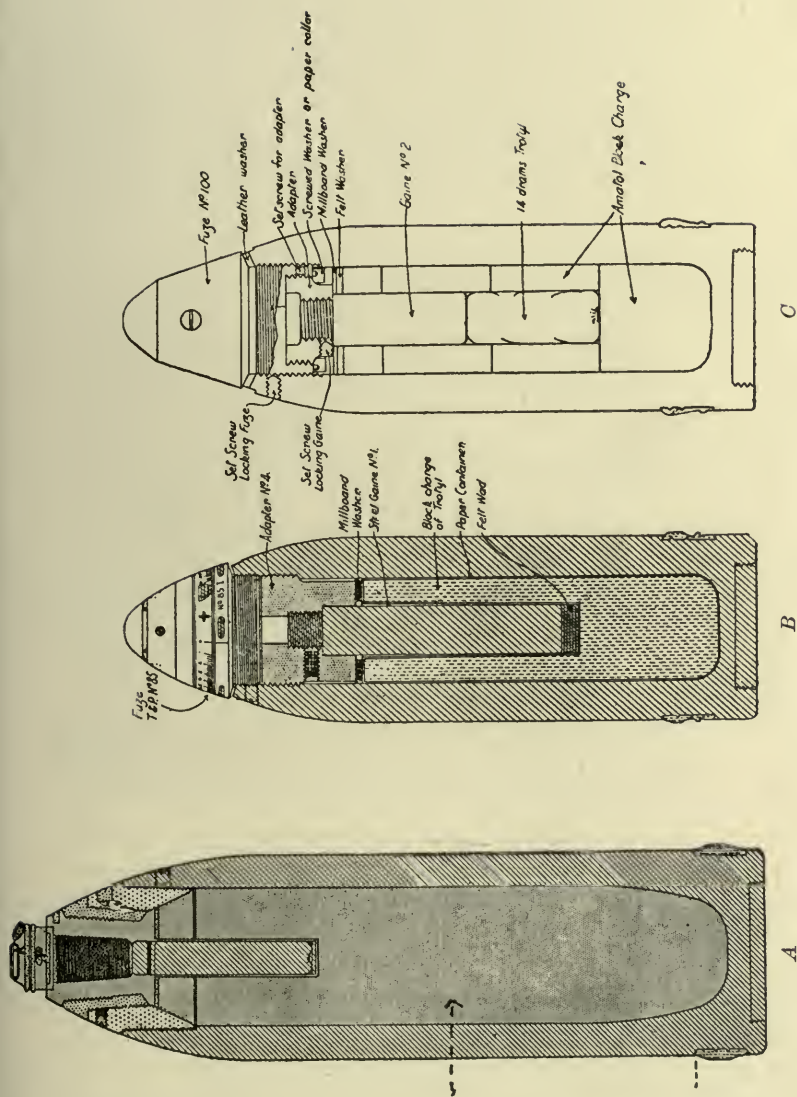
Shows cross section of high-explosive shell : (A) for 4.5 inch howitzer, case filled with trotyl, and (B) 13 and (C) 18-pounder high-explosive shells.
